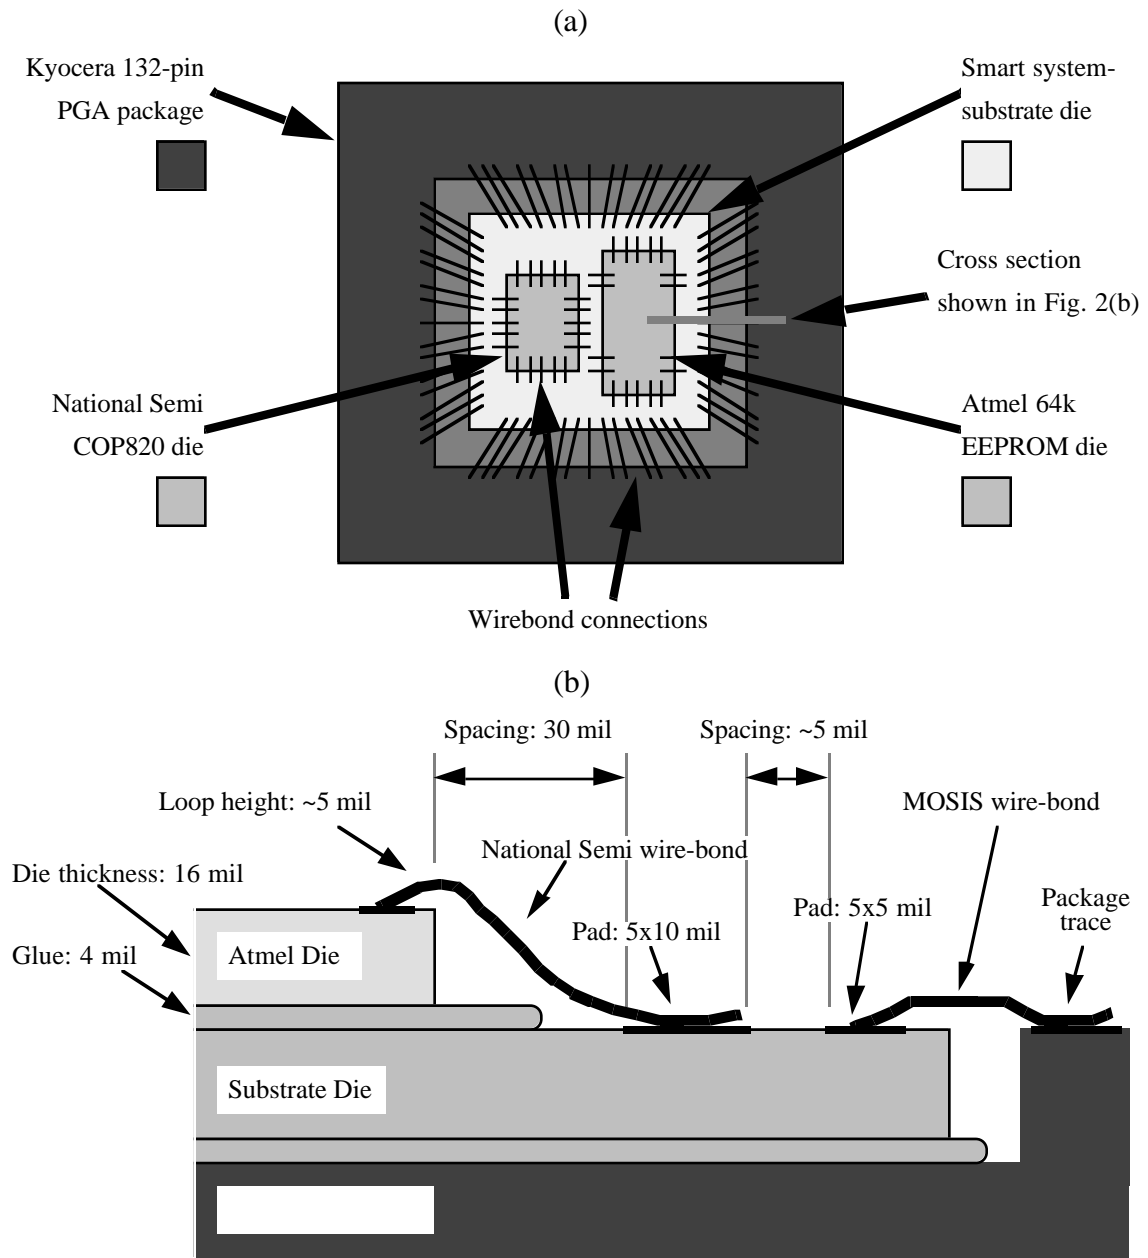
Prototype system packaging technology. (a) PGA package top view and (b) wire-bonding cross section with dimensions (not drawn to scale).
